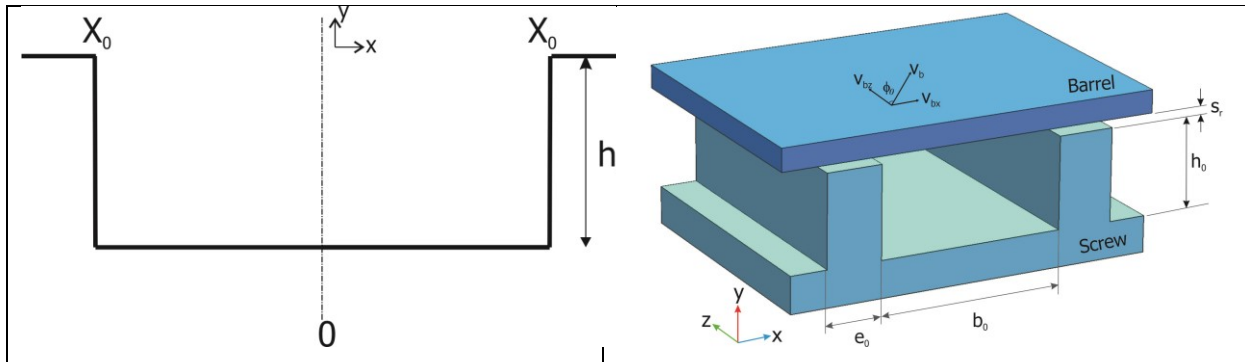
Cross sectional view of box (or) double shear edge screw channel geometry
